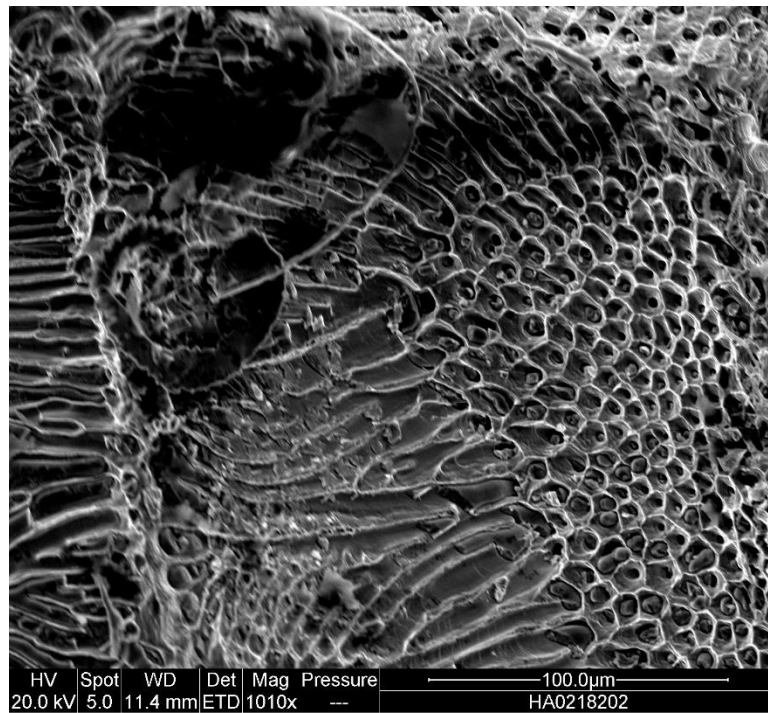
SEM image of sintered 0.2 mm layer height Cu-PLA tensile fracture
